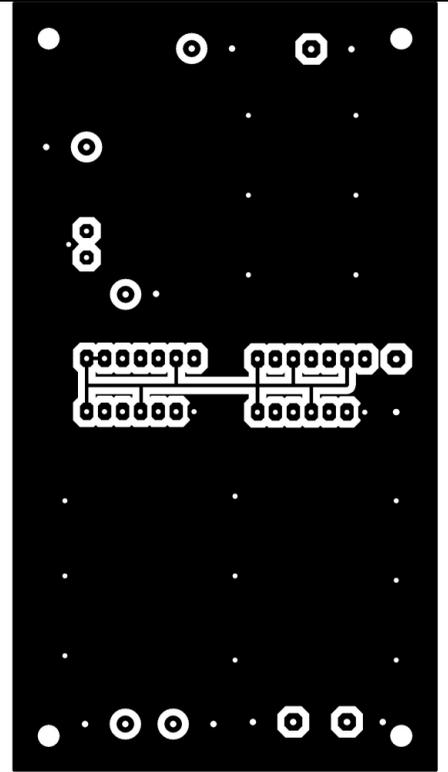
The layout for the bottom side of the six 10MHz output PCB.
